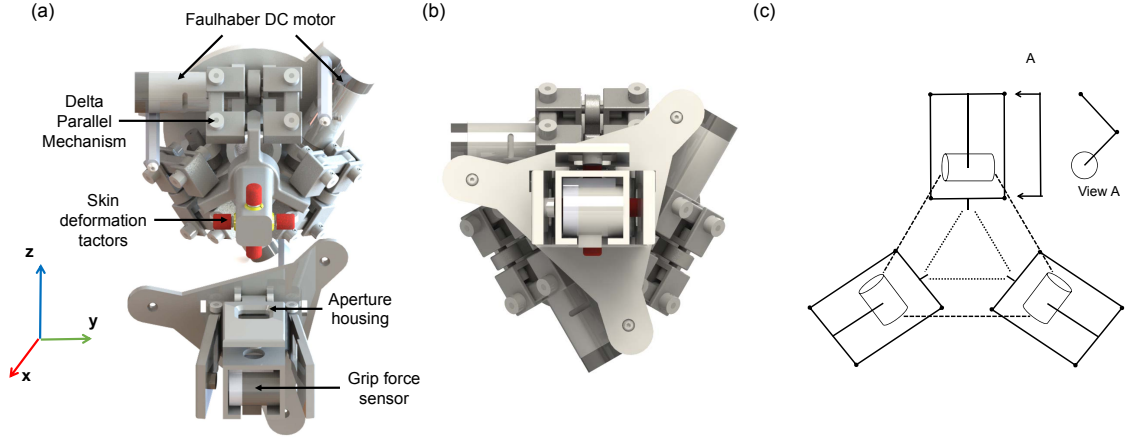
Design of the 3-DoF skin deformation tactile device. The device consists of a Delta parallel mechanism actuated by 3 geared DC motors. (a) Exploded view of the device, (b) assembled device, (c) kinematic diagram of the Delta parallel mechanism.
